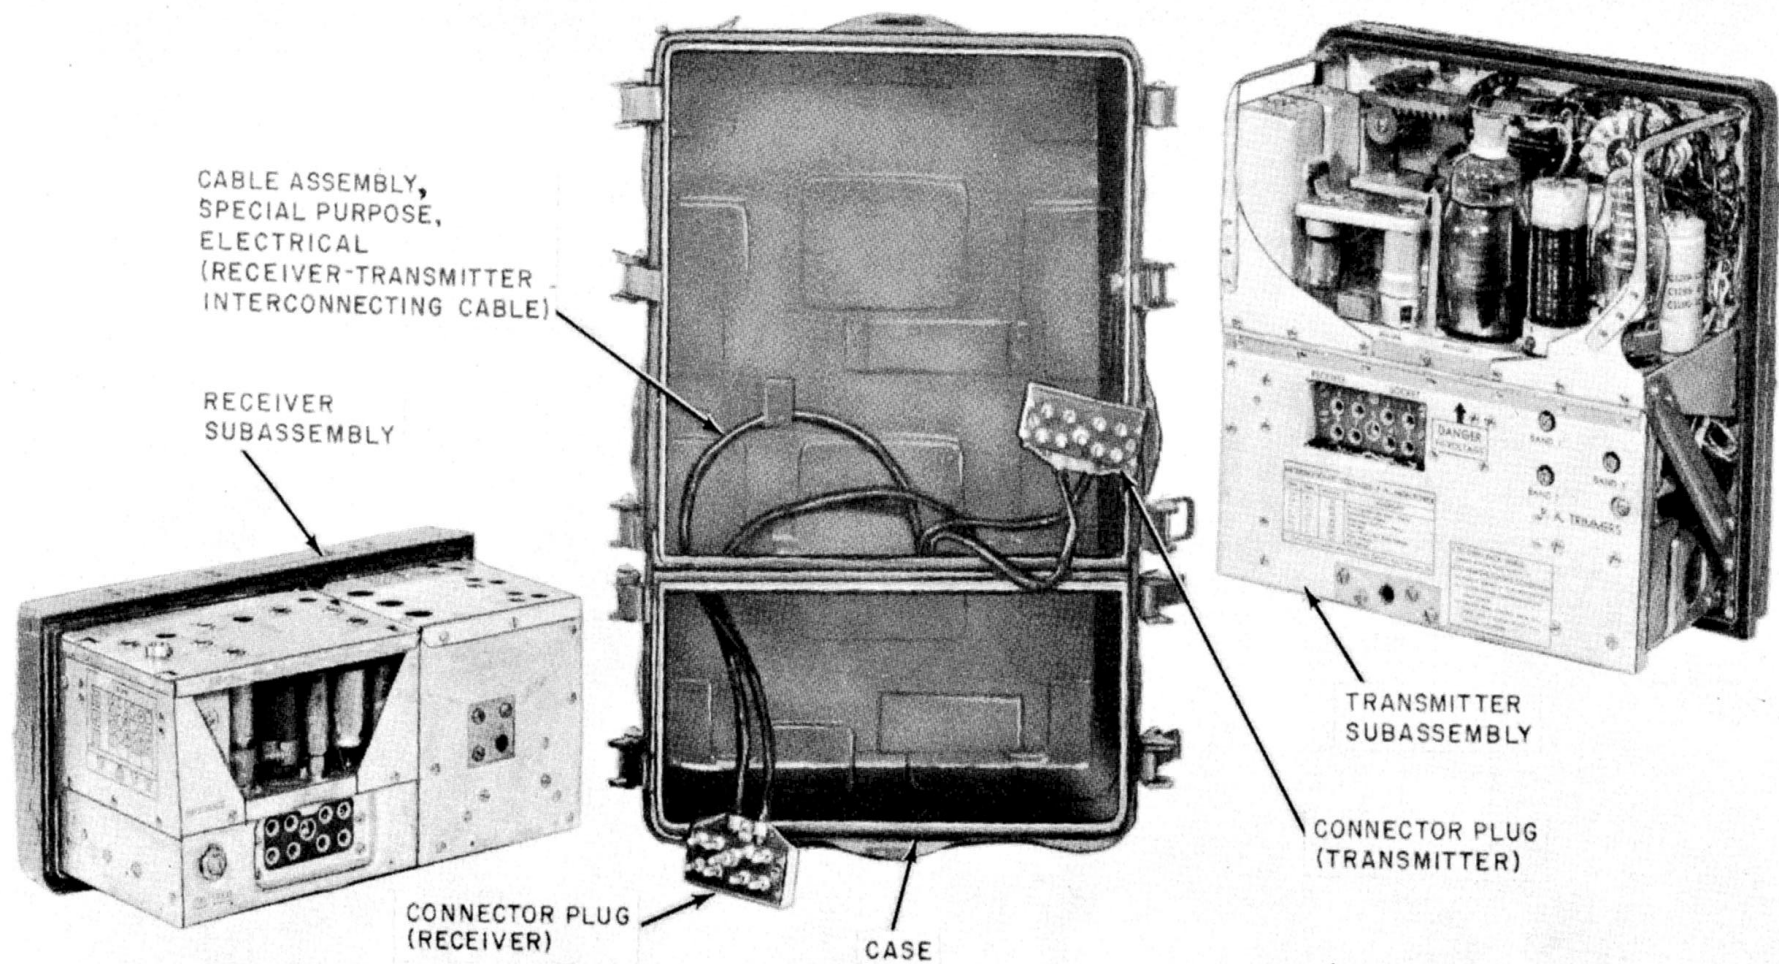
RT-77(\*)/GRC-9, subassemblies removed.
